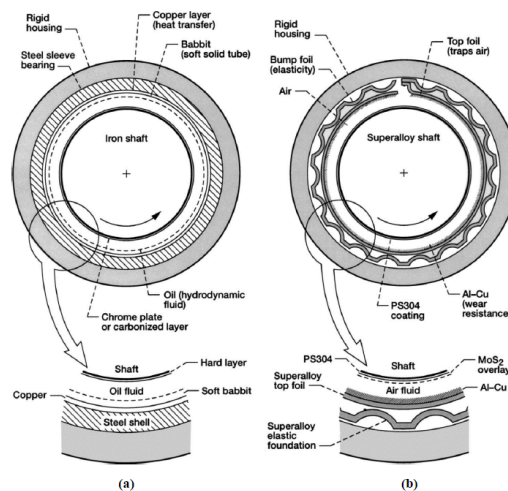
Schematic representation of (a) oil-film bearings and (b) foil bearings
